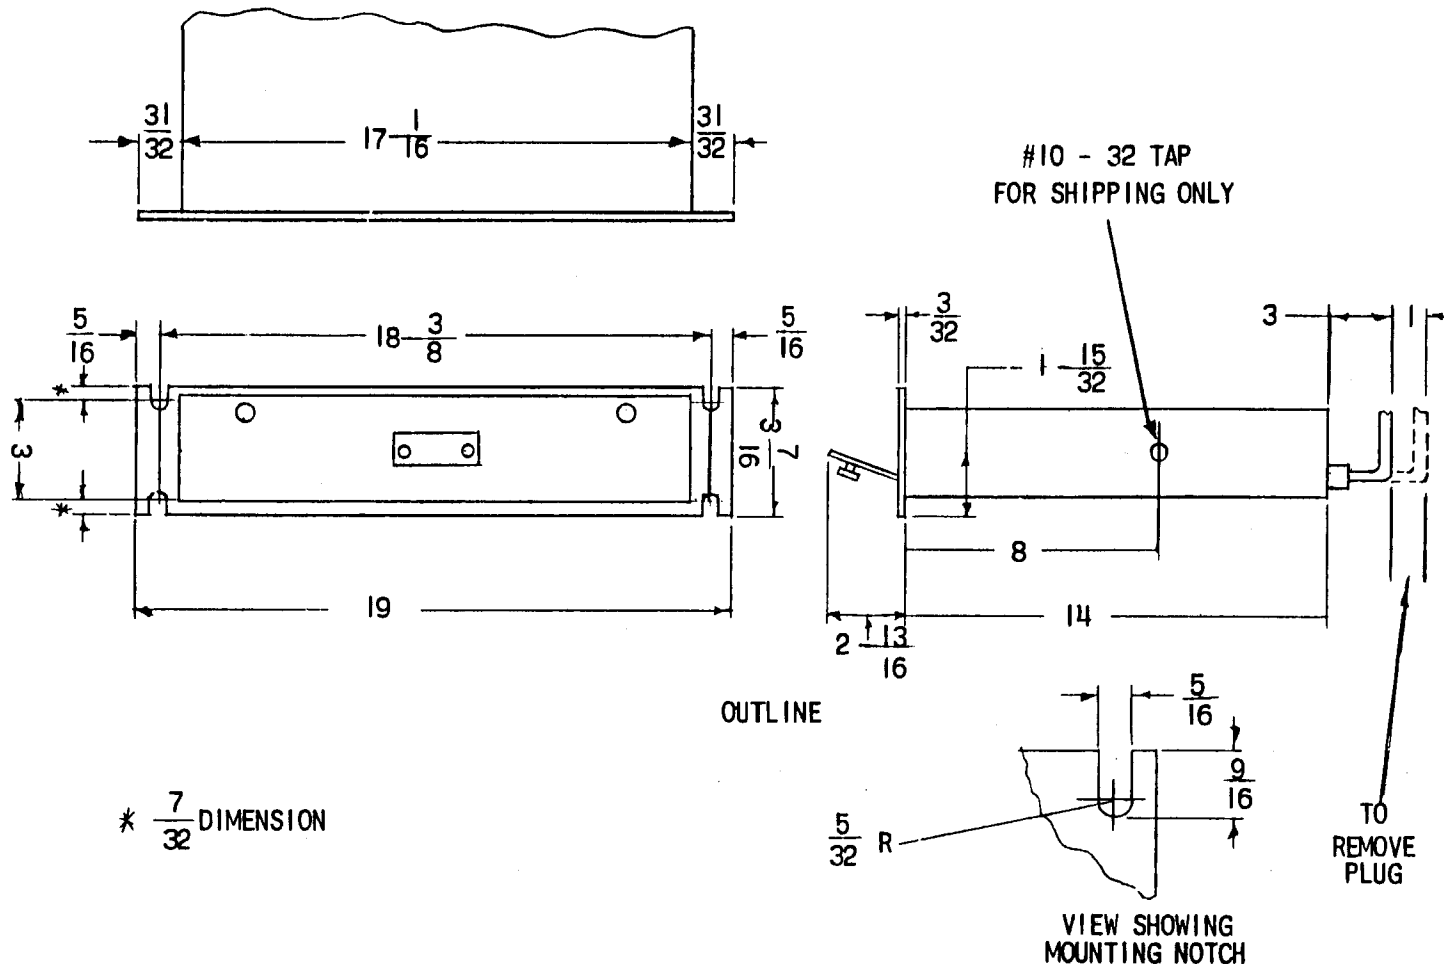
(0227A2036-0) Outline and Mounting Dimensions for the Type SLAT61L Relay
